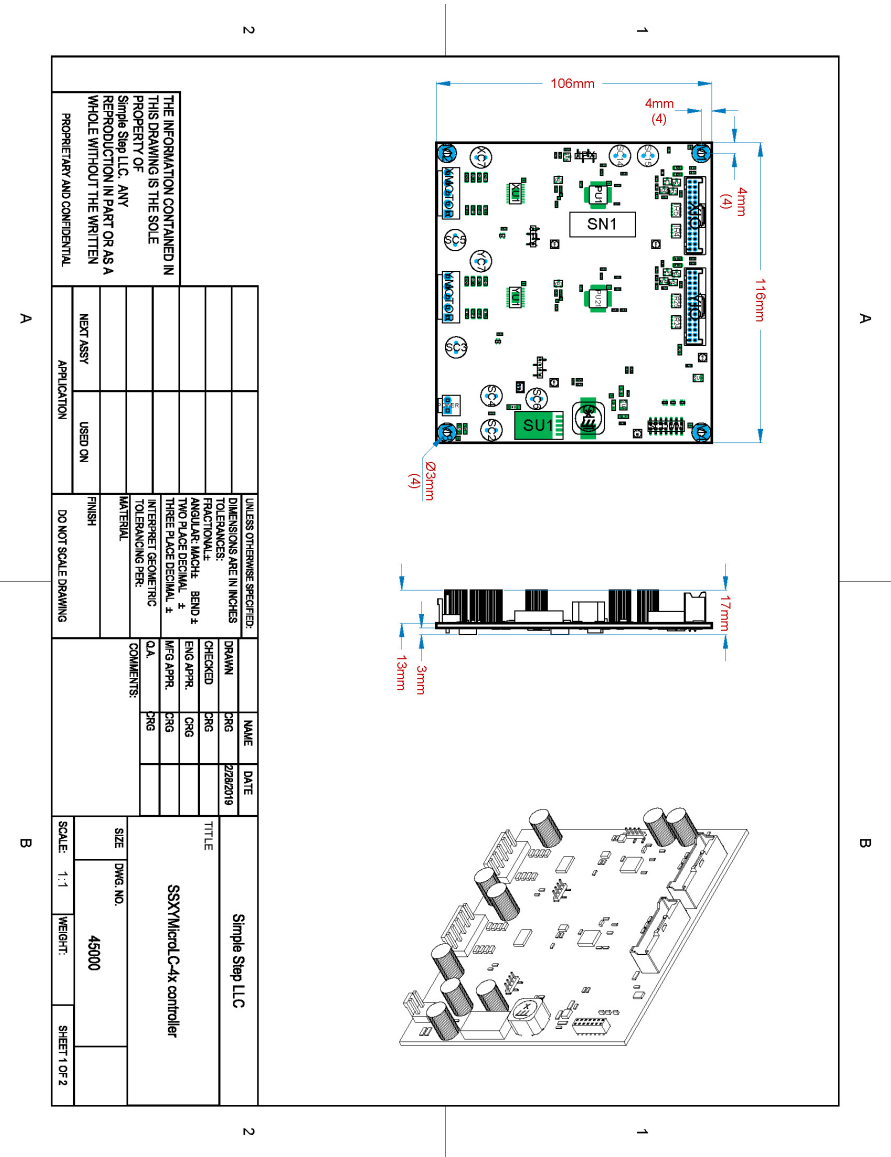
SSXYMicroLC Board Mounting Hole Outline
